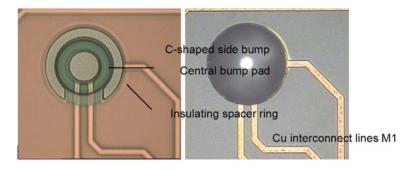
Top view LOM picture of cross-linked bump after UBM deposition (still in resist) (*left*) and after solder plating and reflow (*right*)
